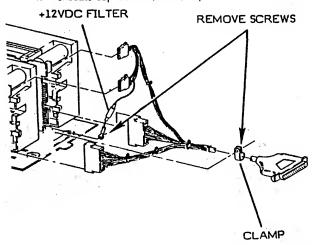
DISK DRIVE HARNESS REMOVAL
